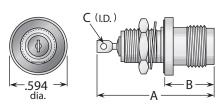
(Front mount, hermetically sealed, with mounting gasket)
